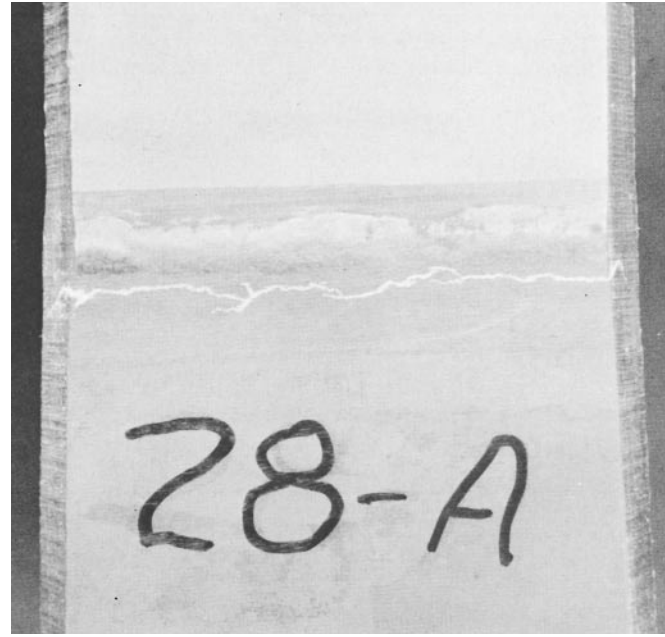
shows a photograph of a typical pipe-to-pipe weld segment. The root area is slightly rough and some hint of counterbore preparation can be seen just adjacent to the weld root. The as-welded condition on the outside diameter is quite acceptable for most nondestructive testing applications.
